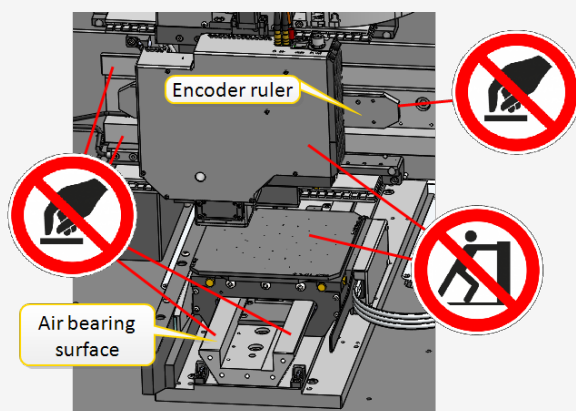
Do not move the substrate table without air pressure applied, do not touch the air bearings.
